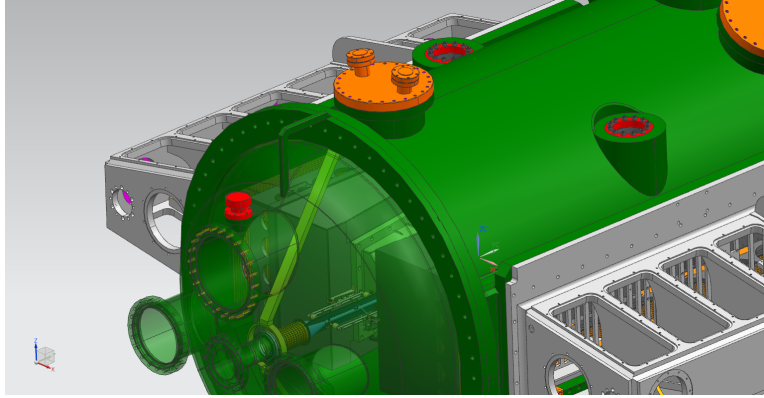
Flange on top of the VELO vessel to be used for the gas feed-through and thermocouples connections.
